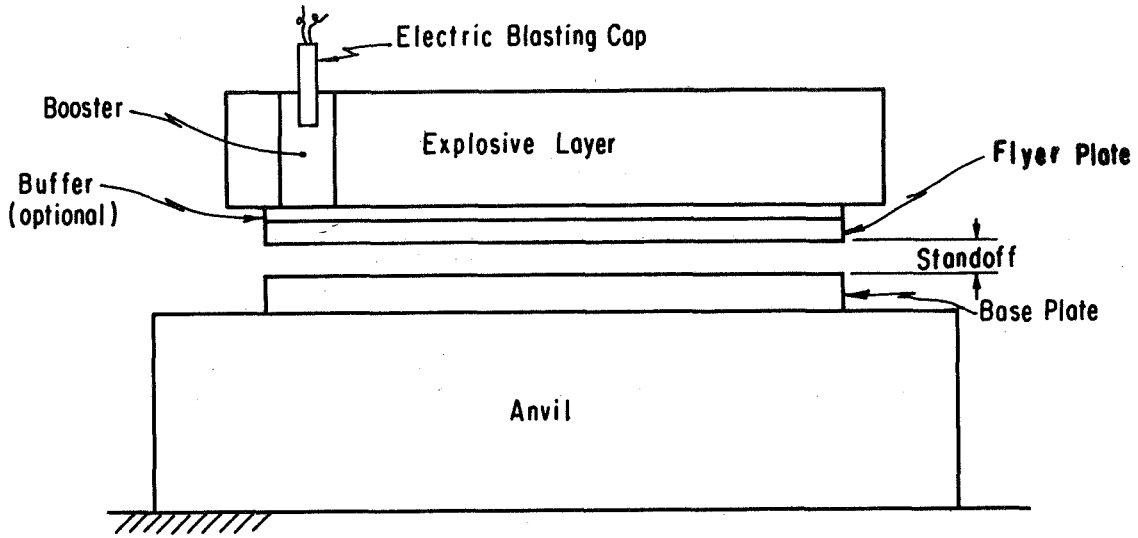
Parallel configuration for the explosive welding of two plates
